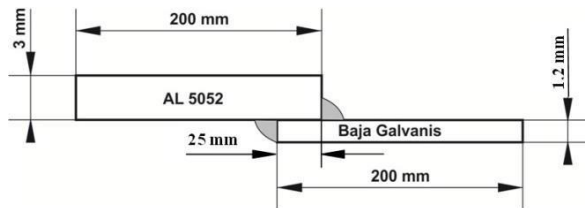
Lap joint plate configuration based on AWS D1.1/D1.1M:2006
